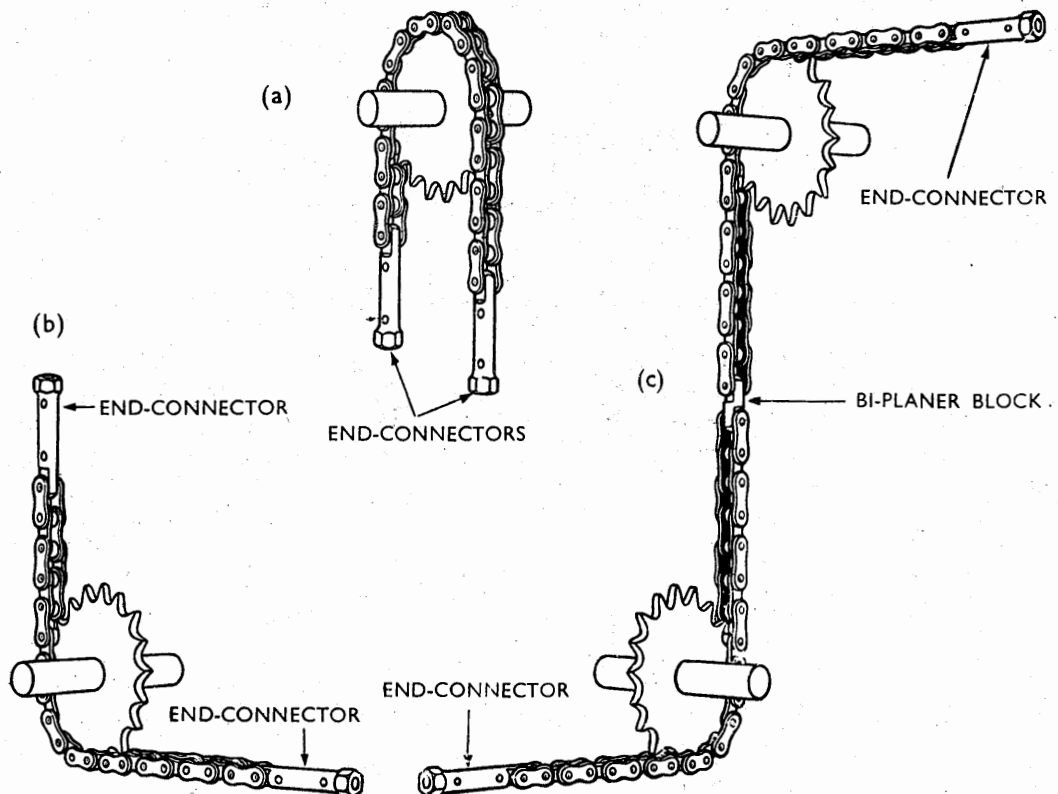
TYPICAL CHAIN ASSEMBLY ARRANGEMENTS
